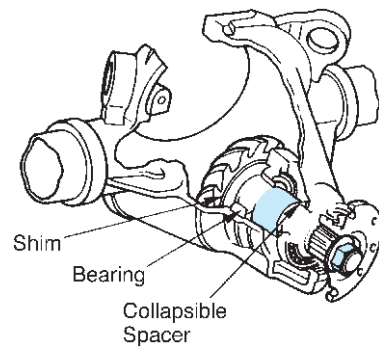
When the drive pinion is replaced, a new collapsible spacer and nut should be used. The bearings, seal, spline, and nut should be lubricated. (Courtesy of Ford Motor Company)
